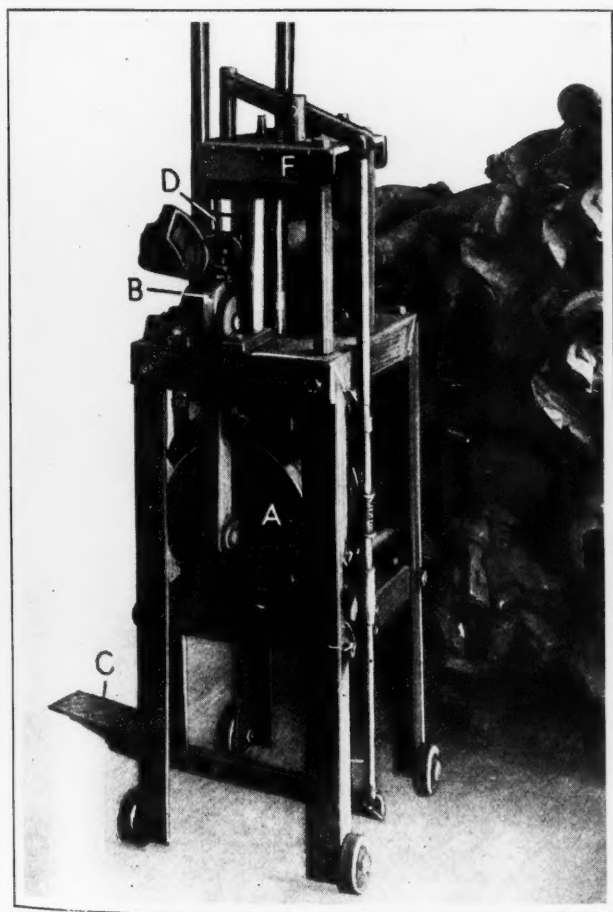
Nut-removing and Nut-tightening Machine for Steam-hose Fittings
